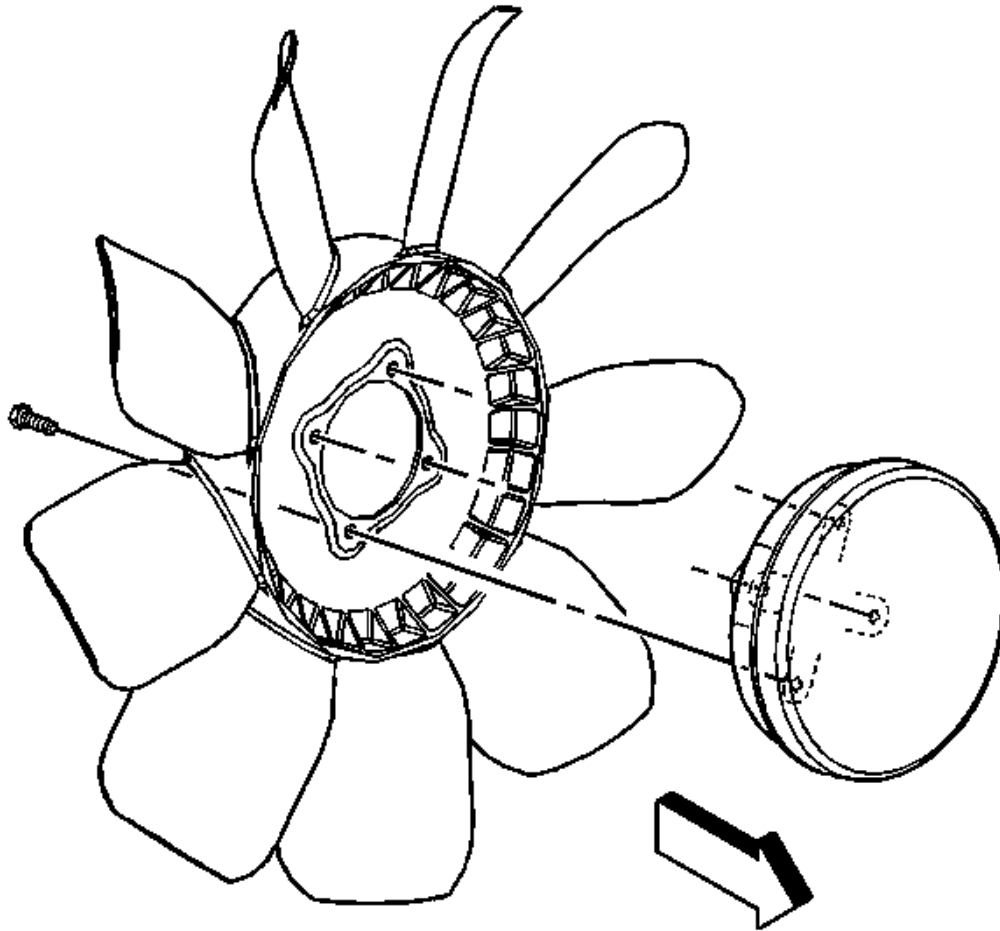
View Of Fan Clutch & Fan Blade
